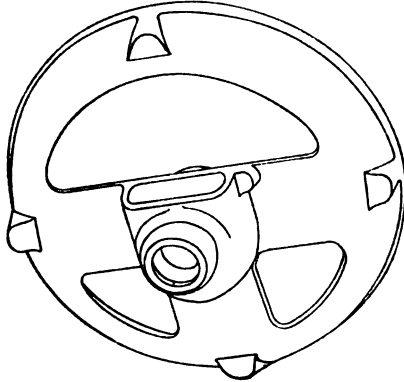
PERSPECTIVE VIEW OF END-SHIELD CASTING IN THE ROUGH
